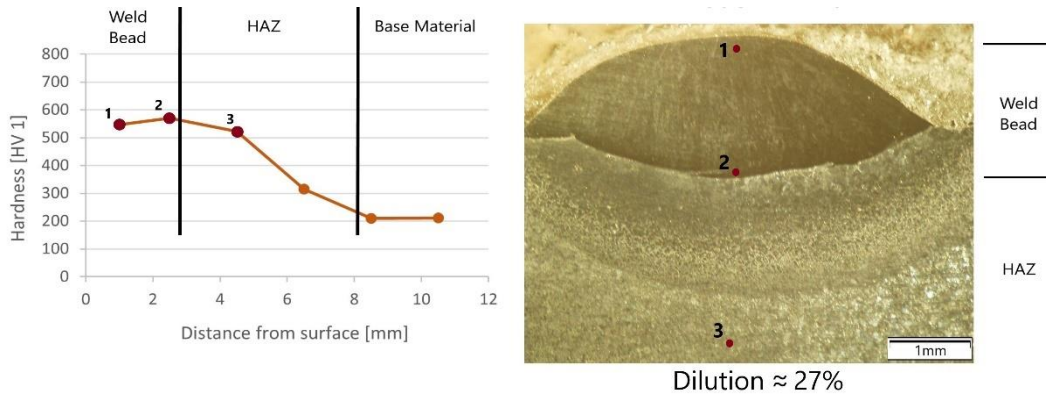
Welding Current: 130A; Welding Speed: 400mm/min; Powder Feed Rate: 20g/min (58)
